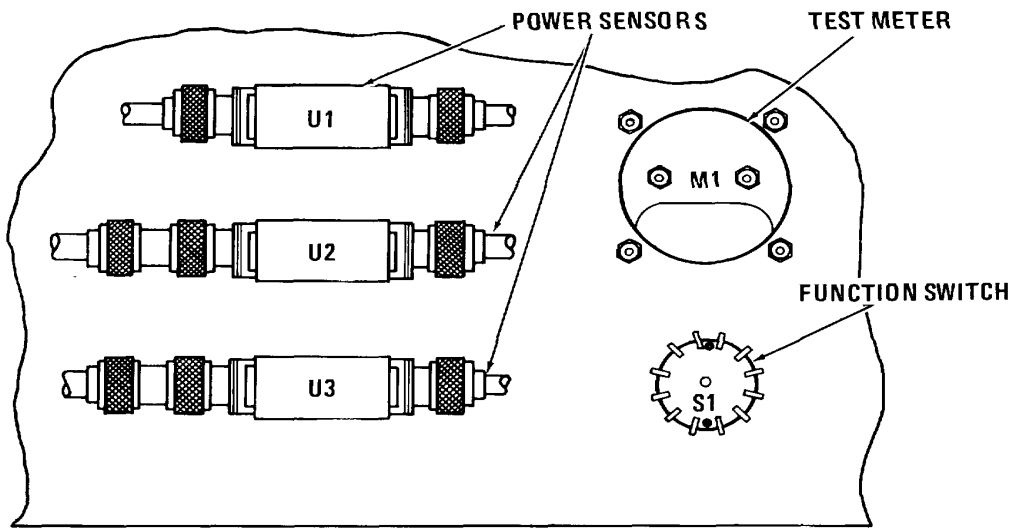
Electrical Equipment Rack Disassembly (Sheet 1 of 3)
